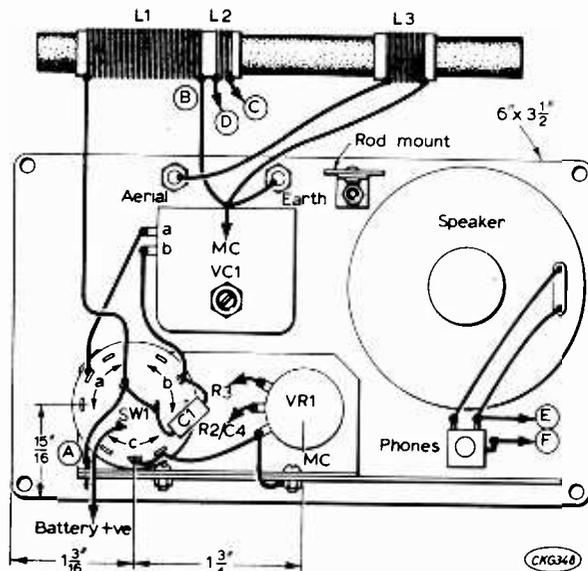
The component wiring on the reverse of the front panel, together with details of the coil connections.
